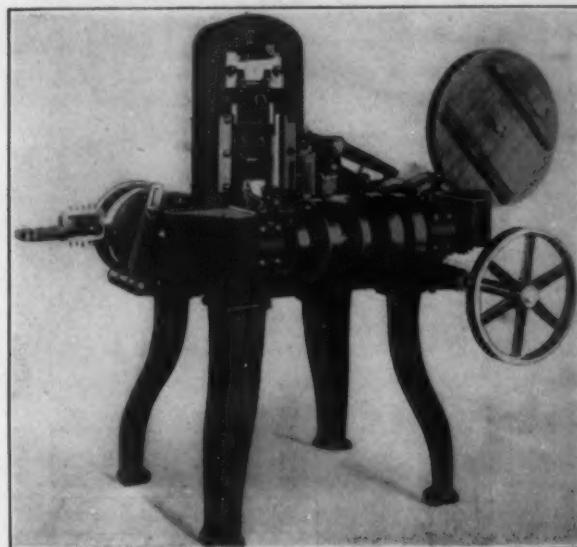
A Combination Machine Built by the Baird Machine Company, Oakville, Conn., for Forming, Stamping and Ferruling Small Wire Articles.
